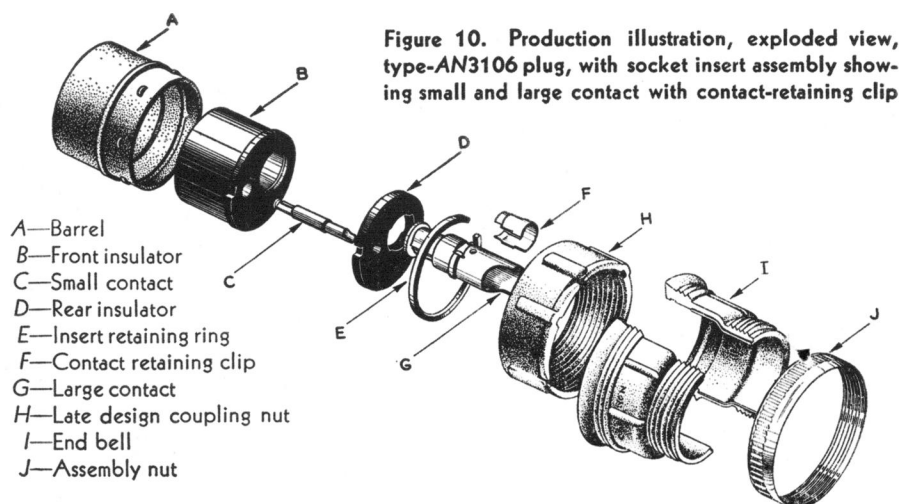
Production illustration, exploded view, type-AN3106 plug, with socket insert assembly showing small and large contact with contact-retaining clip
